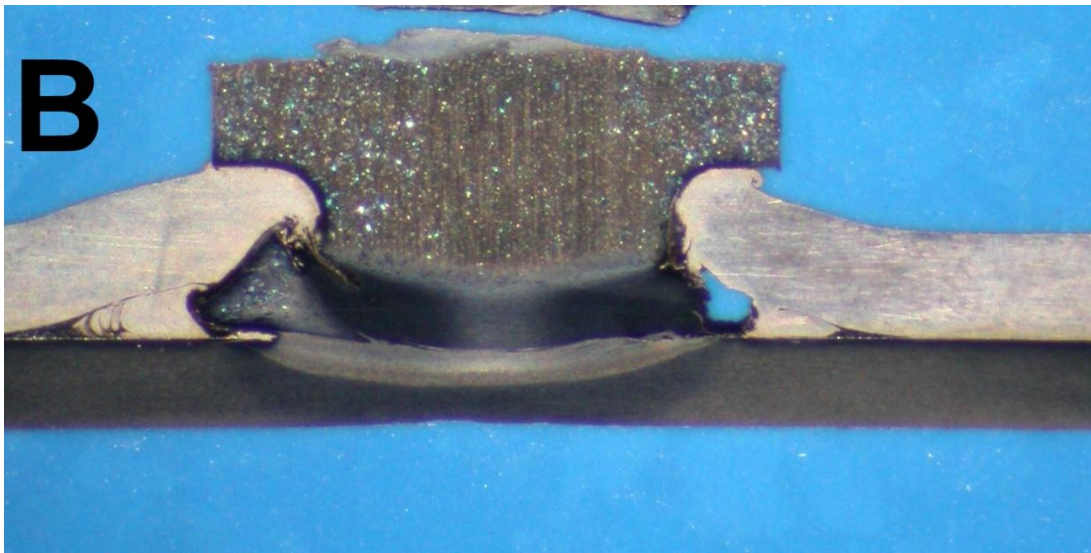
Sample B, nominal welding depth 3.56 mm
